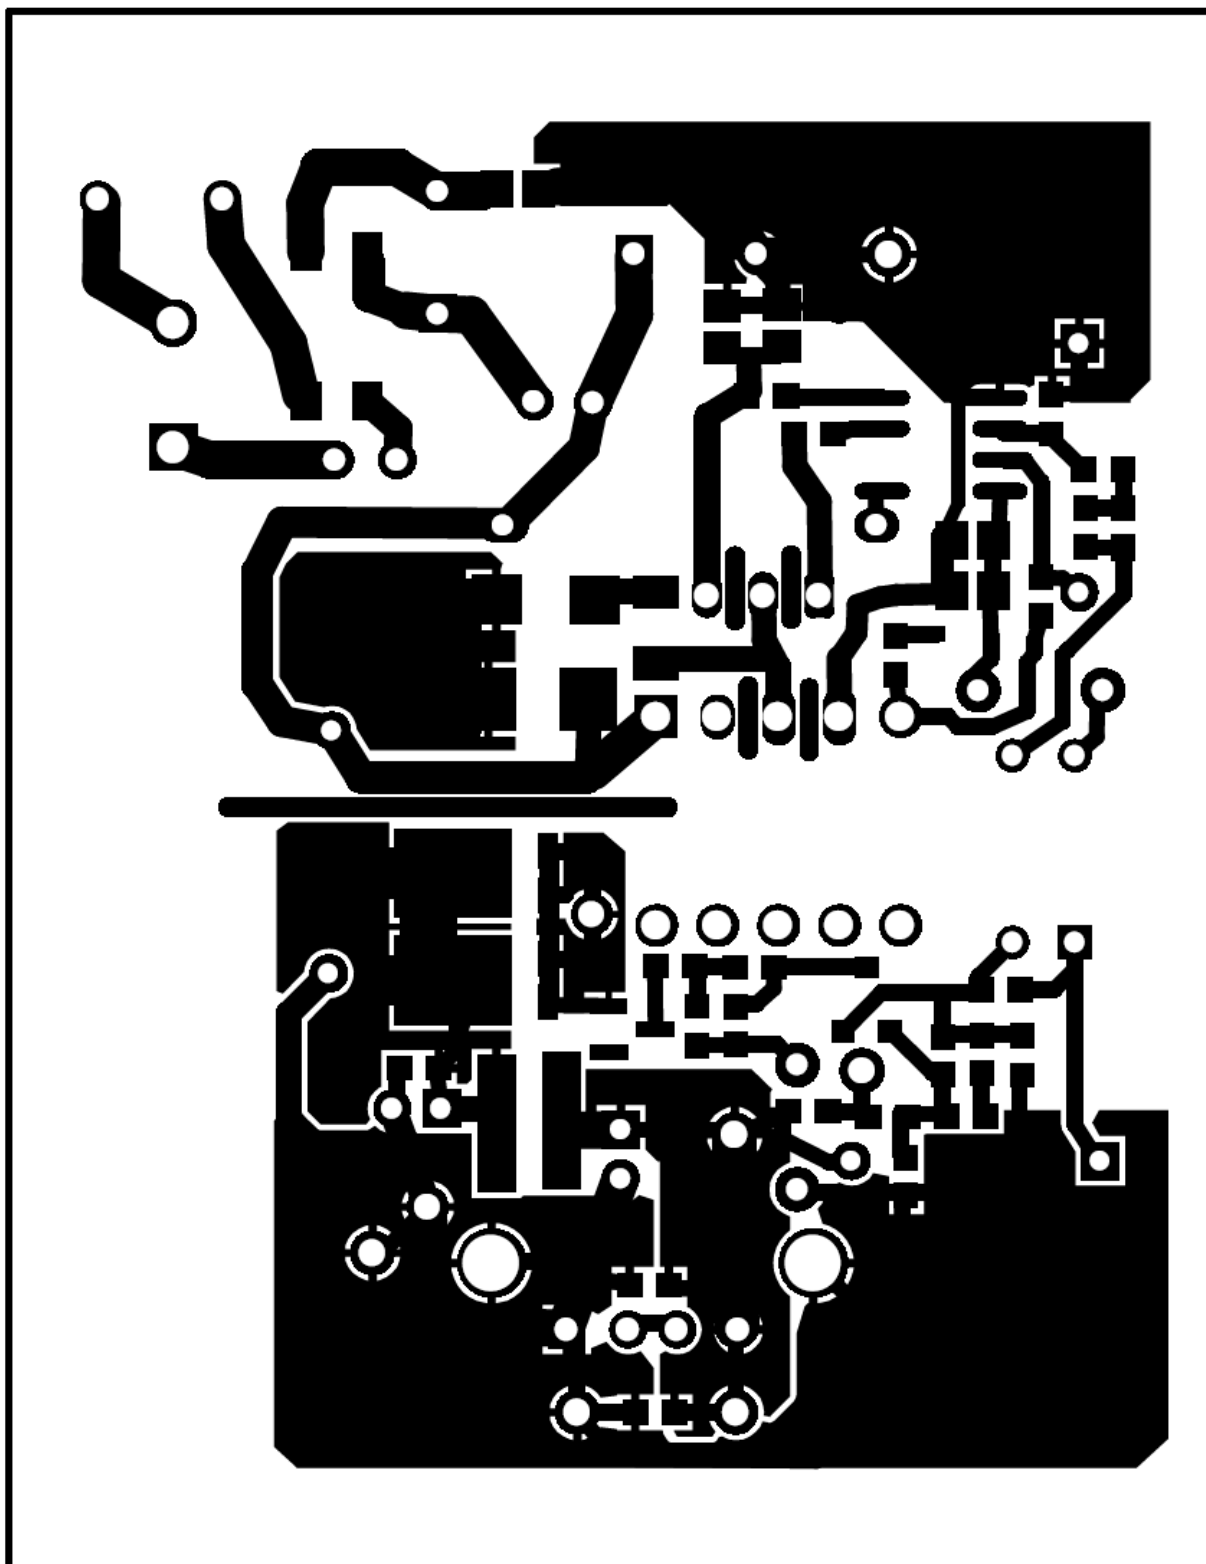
UCC28740EVM-525 Bottom Copper (Bottom View)
